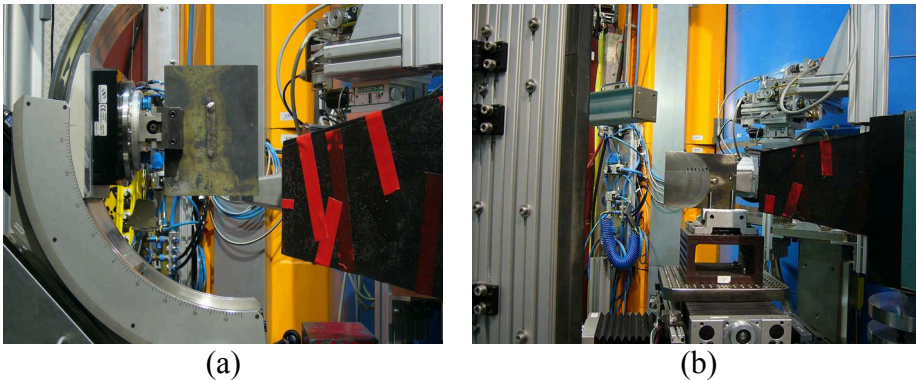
STRESS-SPEC measuring setup for (a) AISI 316 sample after welding and (b) AISI 316 sample after welding and machining
